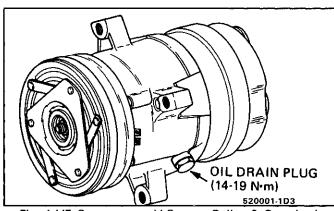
V5 Compressor, V-Groove Pulley & Standard Mounting
